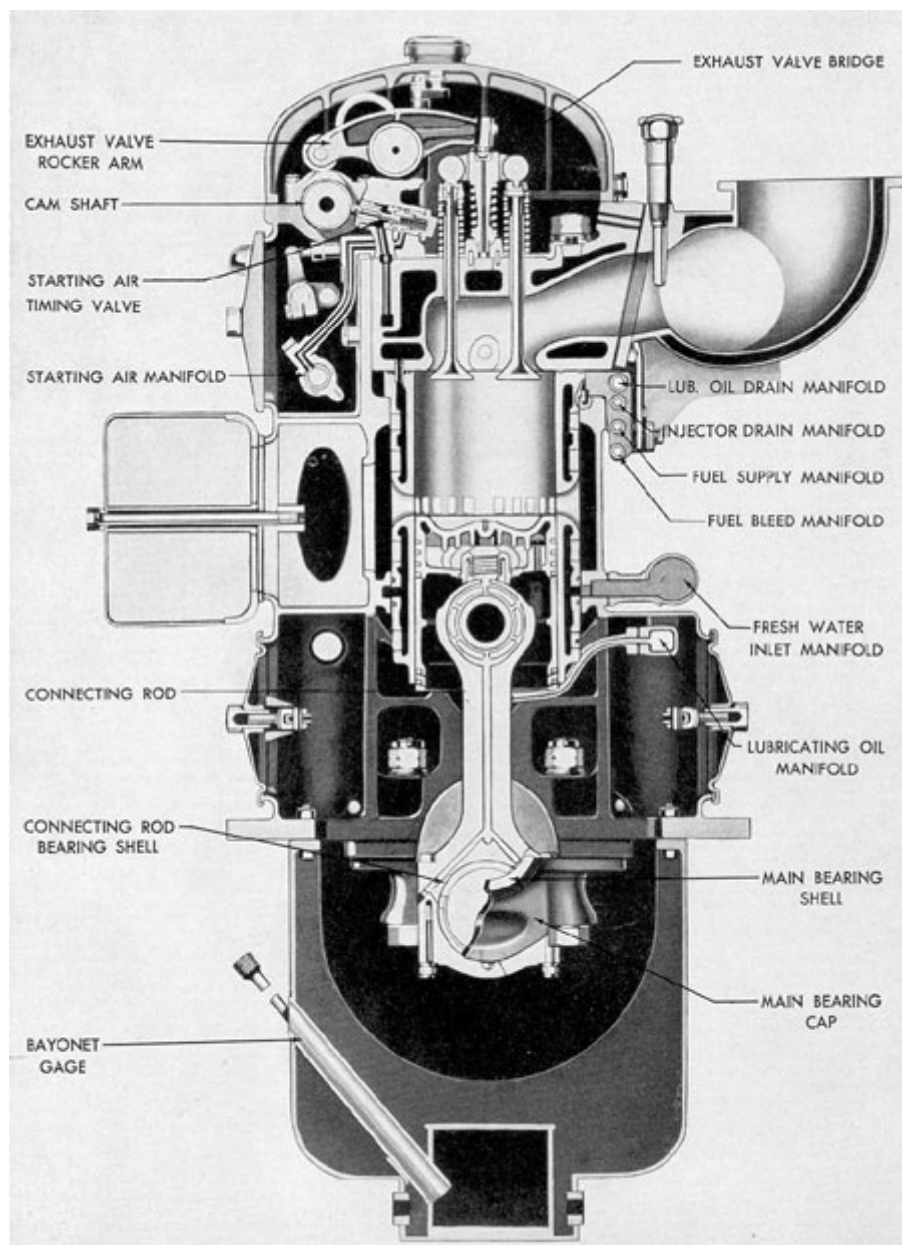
Transverse cross section of GM 8-268 auxiliary engine.
